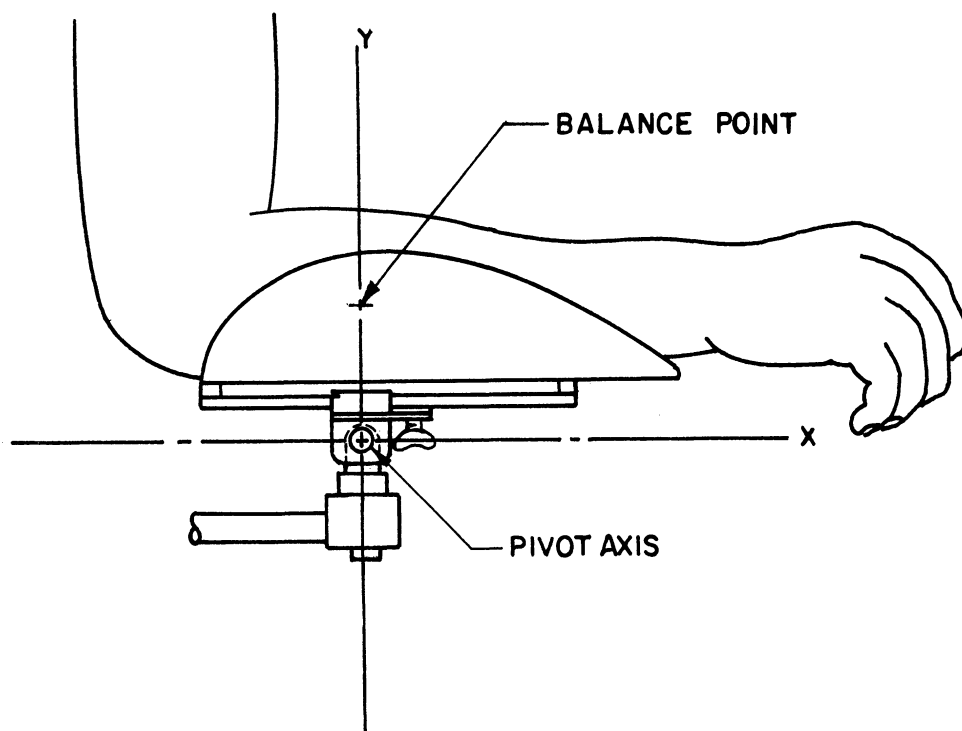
Conventional pivot assembly and X-adjustment mechanism.
